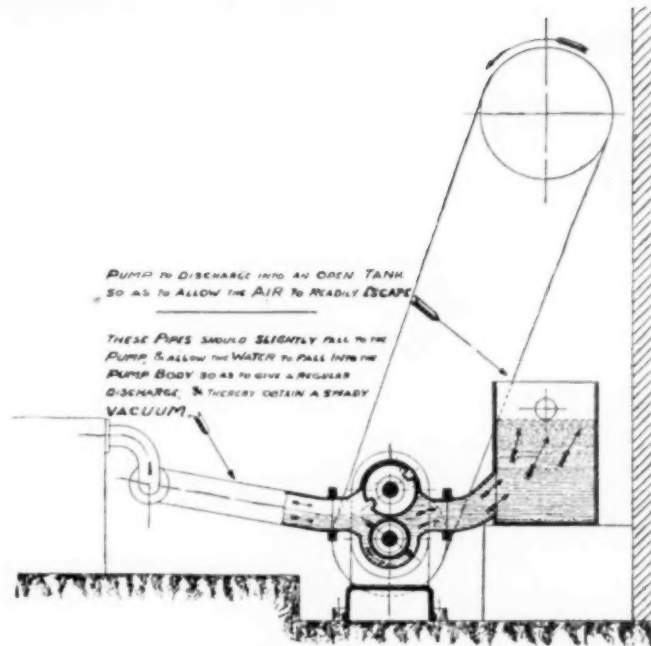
DRUM PUMP APPLIED TO SUCTION BOXES OF PAPER-MAKING MACHINES
